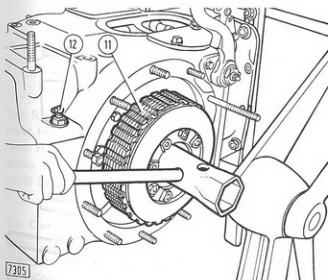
Removing the Steering Clutch Locking Nut with the Bevel Drive Case placed on Rotary Stand Part No. 290086
